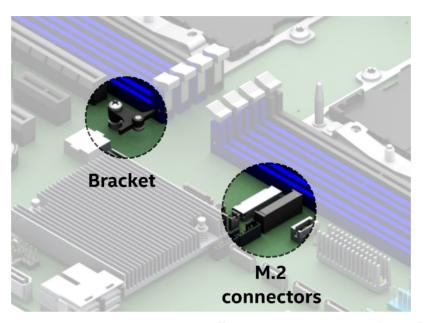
M.2 Storage Device Installation - S2600ST Board Family
